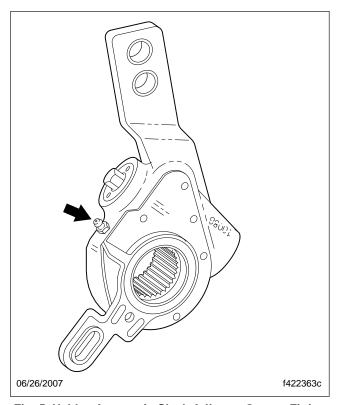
, Haldex Automatic Slack Adjuster Grease Fitting
